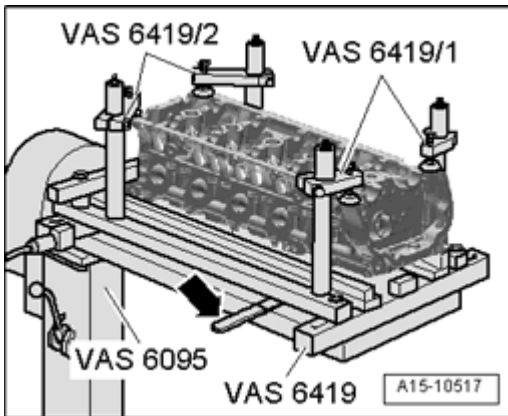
Inserting Tensioning Element VAS 6419 In Engine And Transmission Holder VAS 6095
